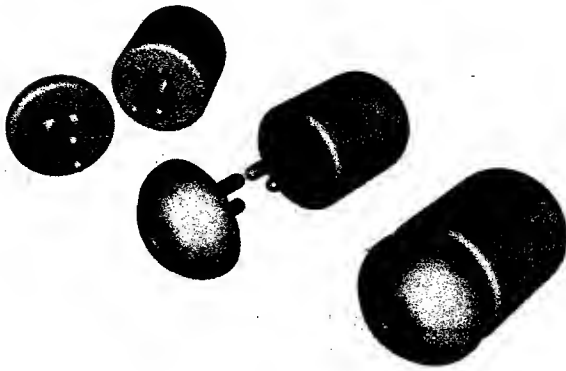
RFI Drift Tubes, Exploded and Assembled.
